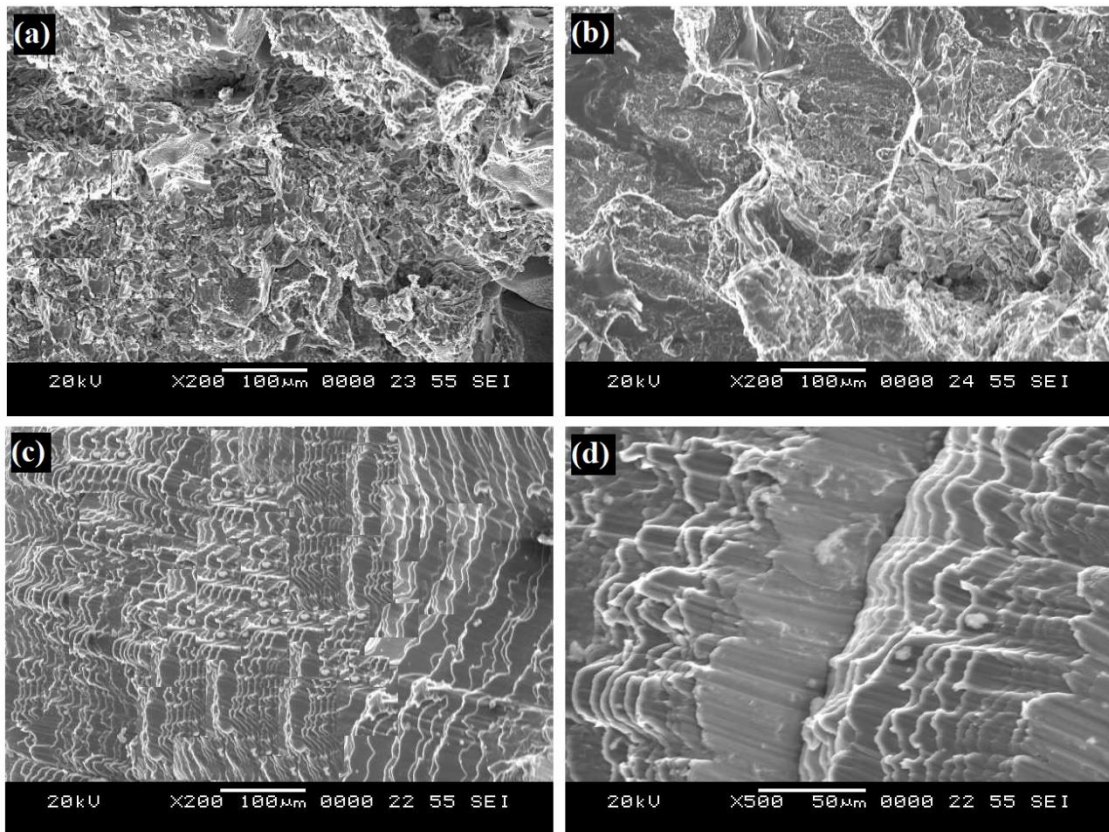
SEM images of tensile fracture surface (tested in the direction of weld) of Al-5Mg-8Ce-3.5Si aluminium alloy joints friction stir welded with TPP tool, at (a) Speed of tool rotation of 1000 RPM and welding speed of 10 mm/min, (b) Speed of tool rotation of 1000 RPM and welding speed of 15 mm/min, (c) Speed of tool rotation of 1000 RPM and welding speed of 20 mm/min, (d) Higher magnification image showing the dimples, pullout, decohesion and cracked AlSiMg particles.
